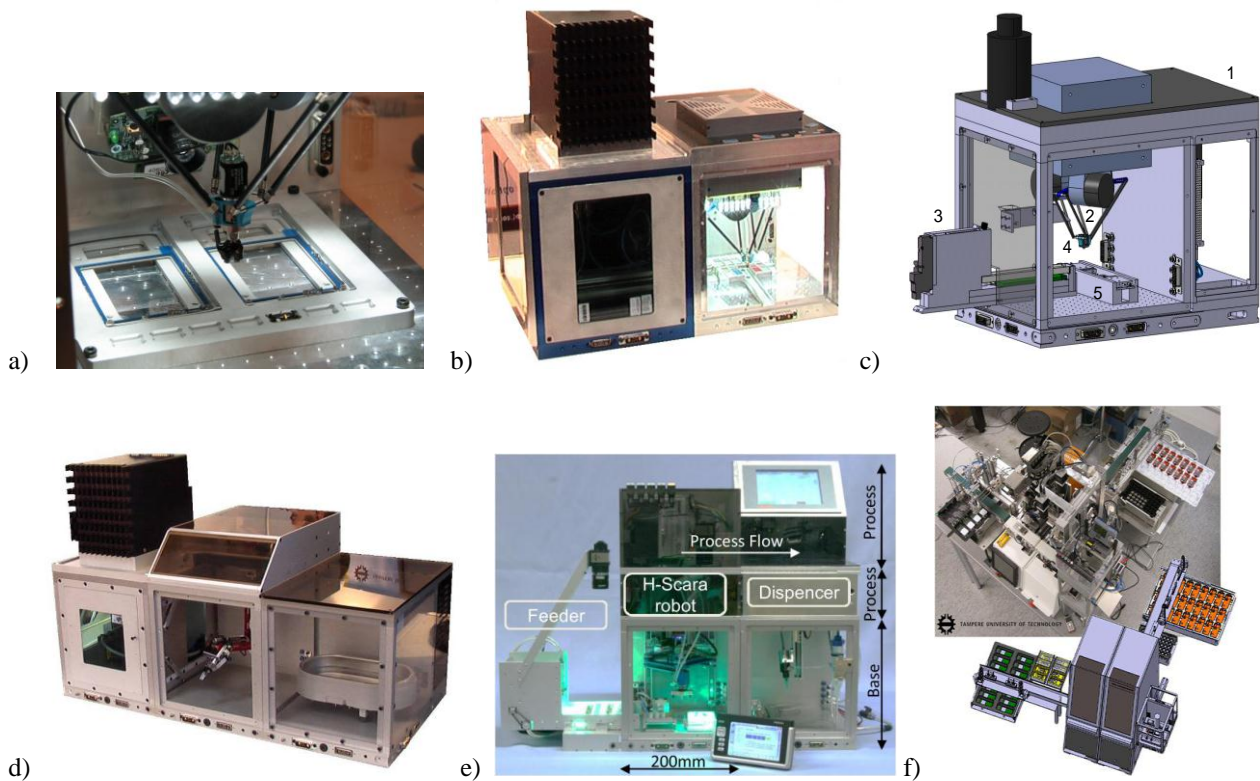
TUT-Microfactory applications: a) a loudspeaker assembly, b) laser marking, c) spring assembly, d) manufacturing of medical implant, e) gas sensor assembly, f) cell phone assembly.
